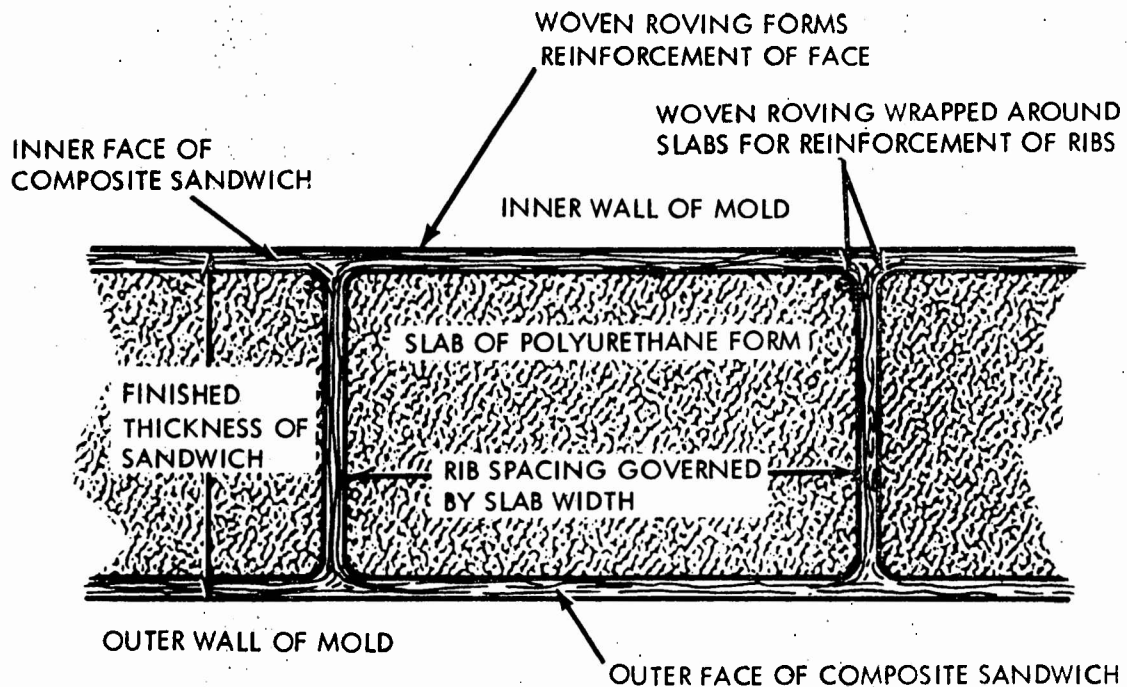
Construction Detail of Litewate Ribbed Composite Sandwich
